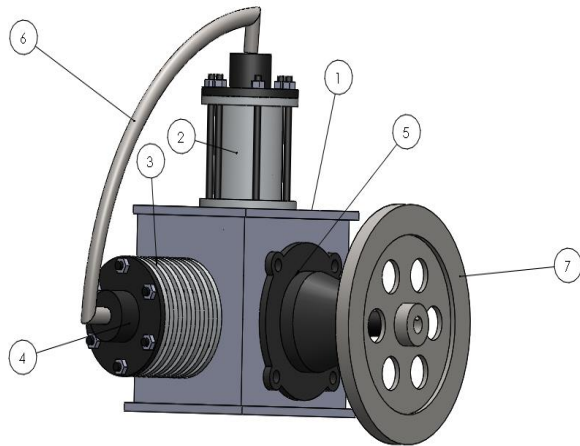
Prototype of the engine in SolidWorks ®. 1. housing. 2. Heating cylinder. 3. Cooling cylinder. 4. Cylinder cover. 5. Crankshaft bearing shaft. 6. Hot-cold connection tube. 7. Flywheel
